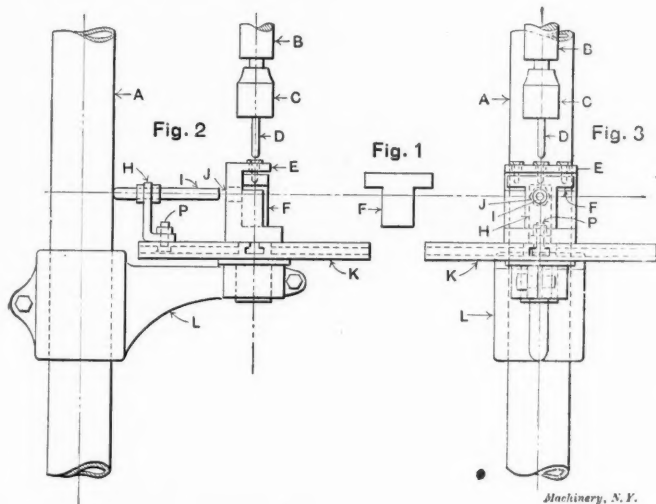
Forging to be Drilled. Figs. 2 and 3. Front and Side of Drill Press with Knock-out Attached.
